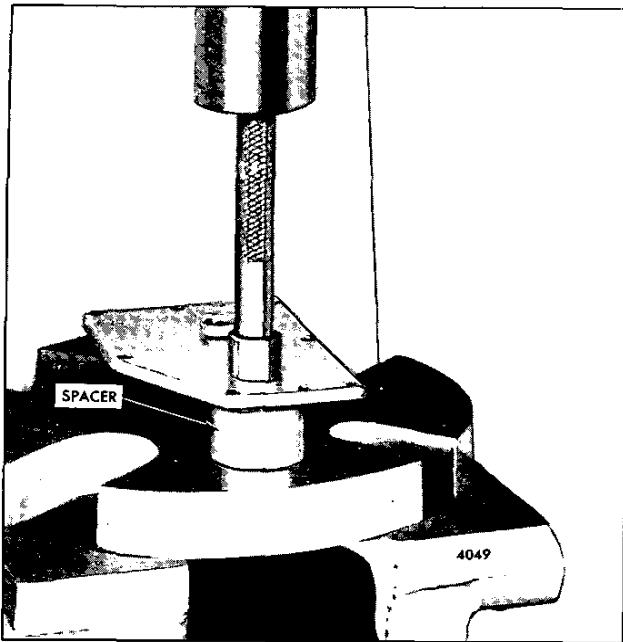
Removing Governor Cover Bearings Using Tool J 21967-01
